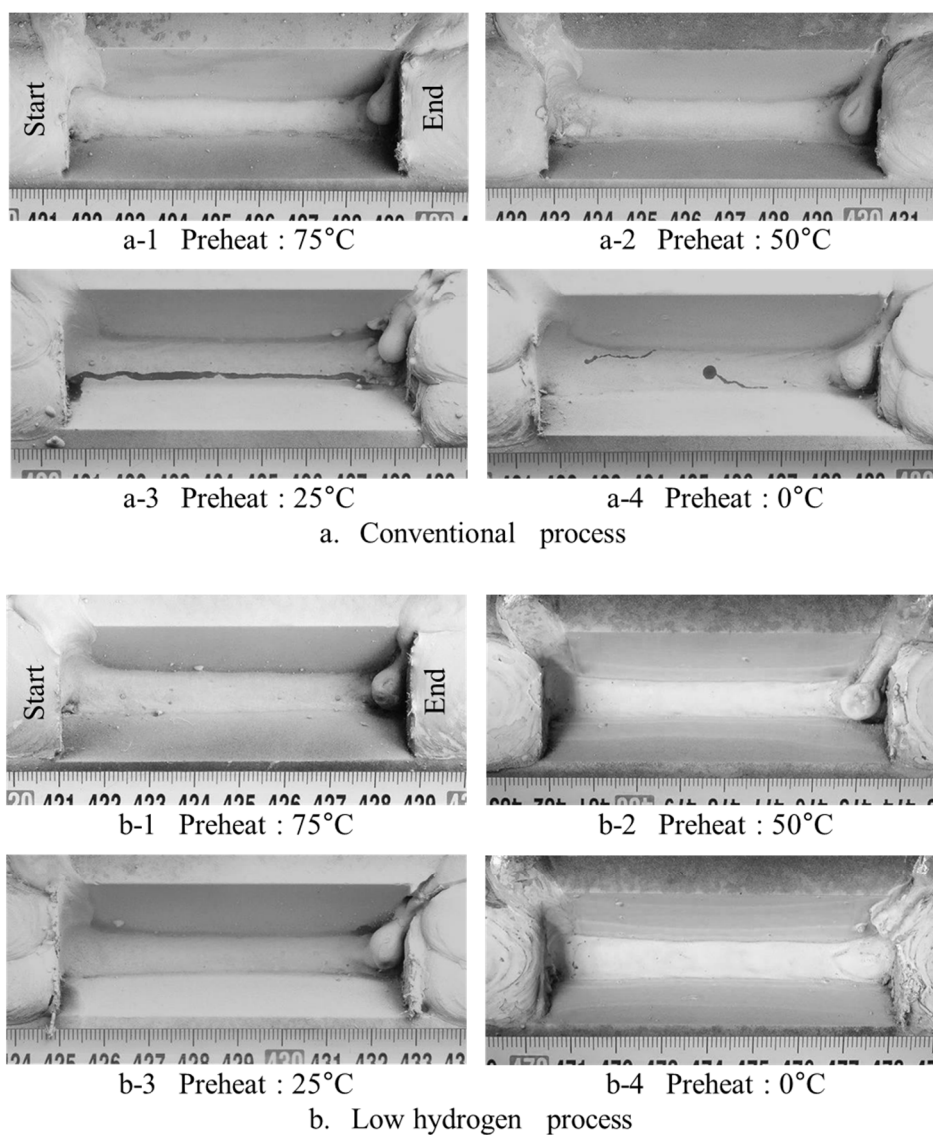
Appearance of test-welding beads under penetrant inspection
